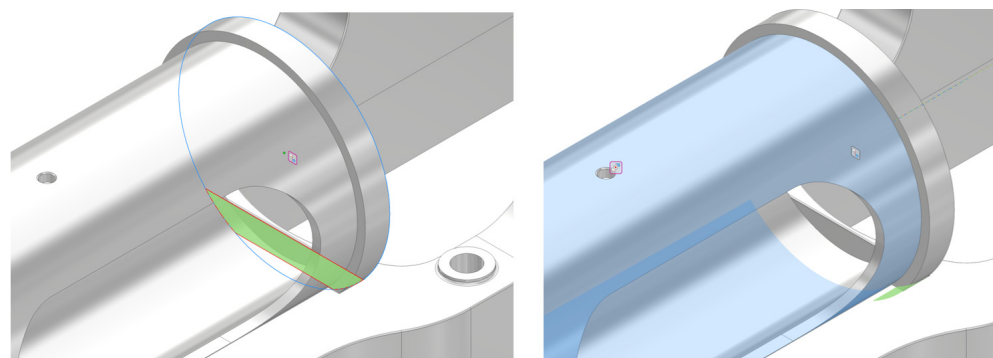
Axonometric view of the fixed elements: front view (left) and rear view (right).
